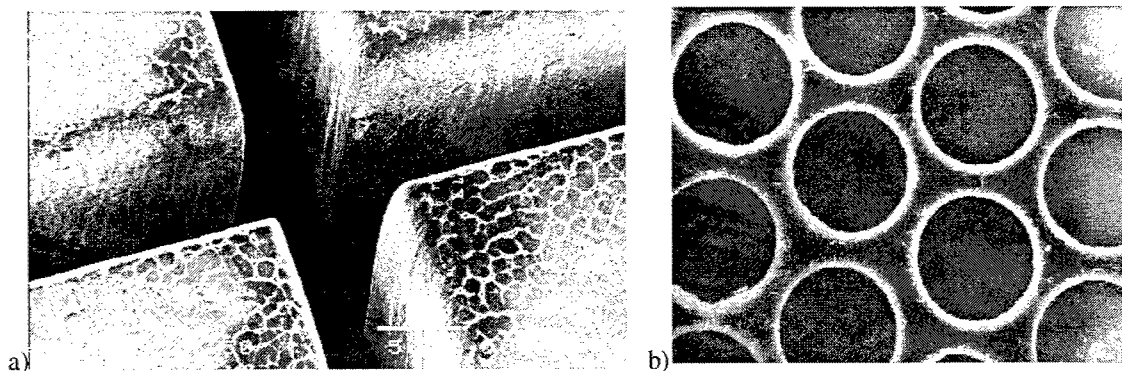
a) Diamond heat spreaders & b) 200µm diameter holes machined using visible CVL beam.
